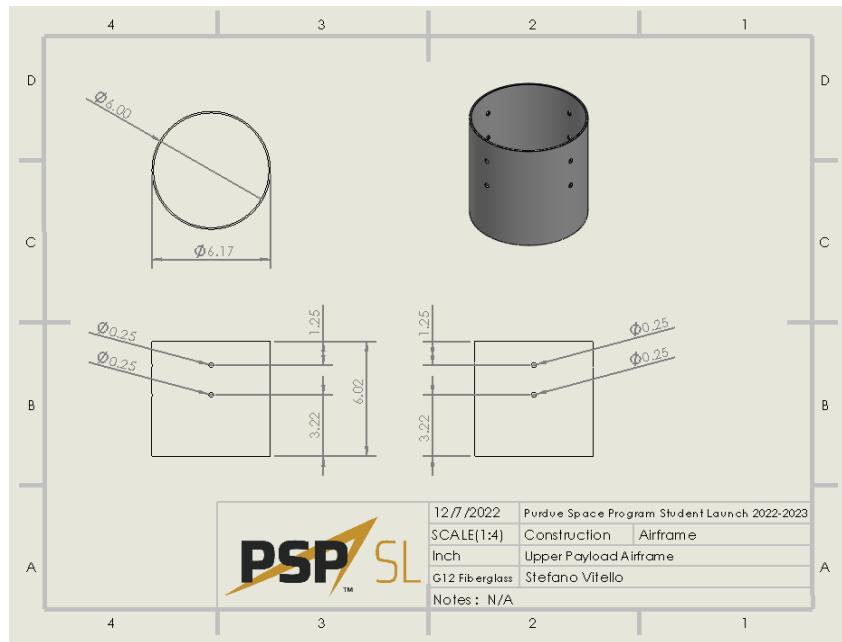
Technical Drawing for Upper Payload Airframe
